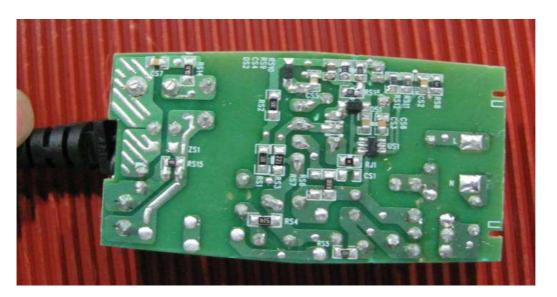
SOLDERING SIDE VIEW OF PCB OF ADAPTER MODEL GT\*41134-\*\*\
